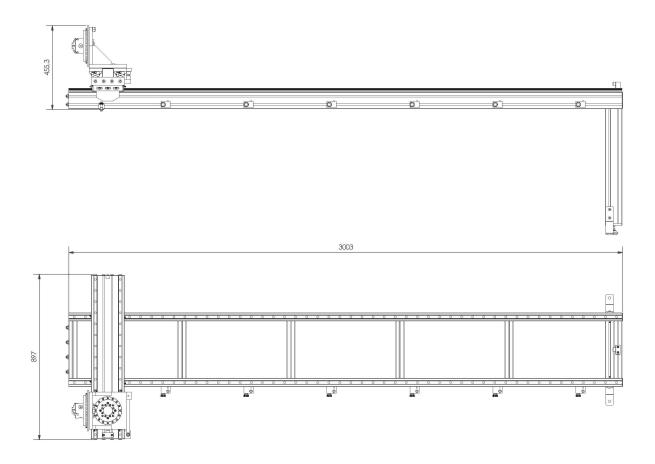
Outside dimensions of Pipe Bender Limit CC60
